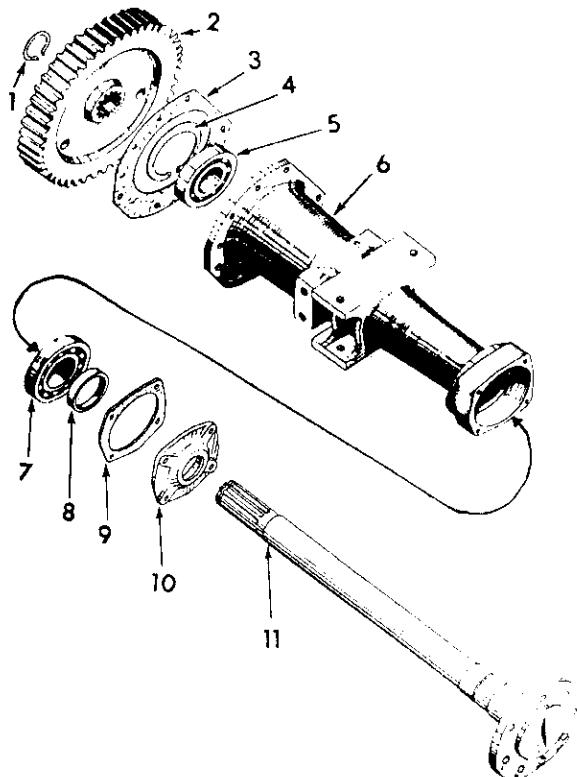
Exploded view of axle, axle carrier and component parts used on Series 424, 444, 2424 and 2444.
